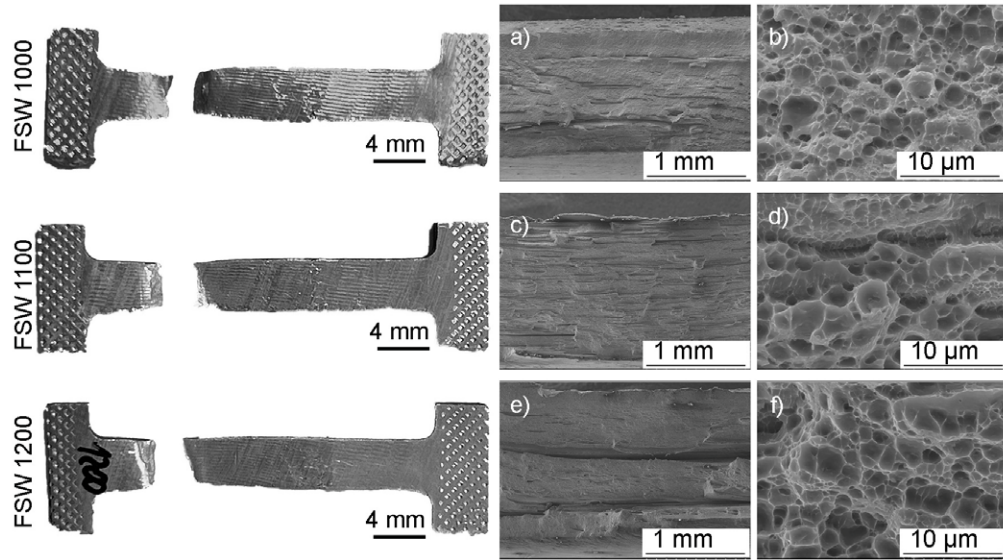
Fracture surfaces of AA6082 RS FSW joints produced at 1000 rpm (a, b), 1100 rpm (c, d), and 1200 rpm (e, f)
